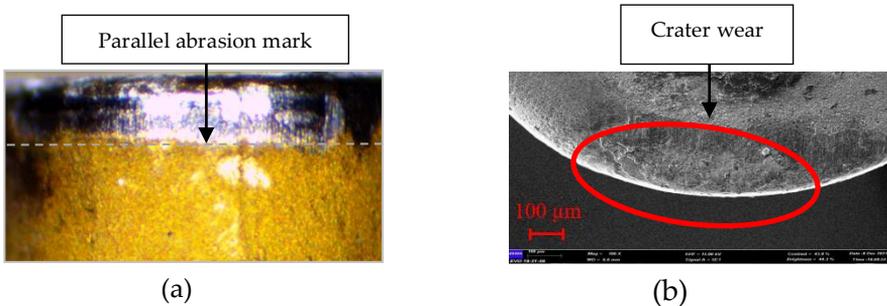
Wear mechanism of (a) front view and (b) top view at 100 m/min Vc and 0.10 mm/rev Fr
